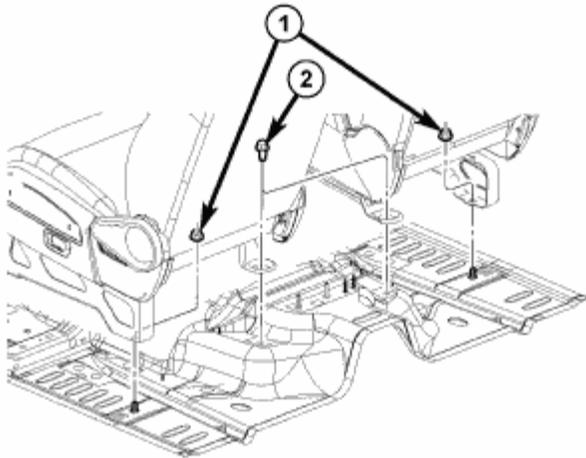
Front Bolts, Seat Belt Bolts, Seat Belts, Side Shield & Electrical Connectors
